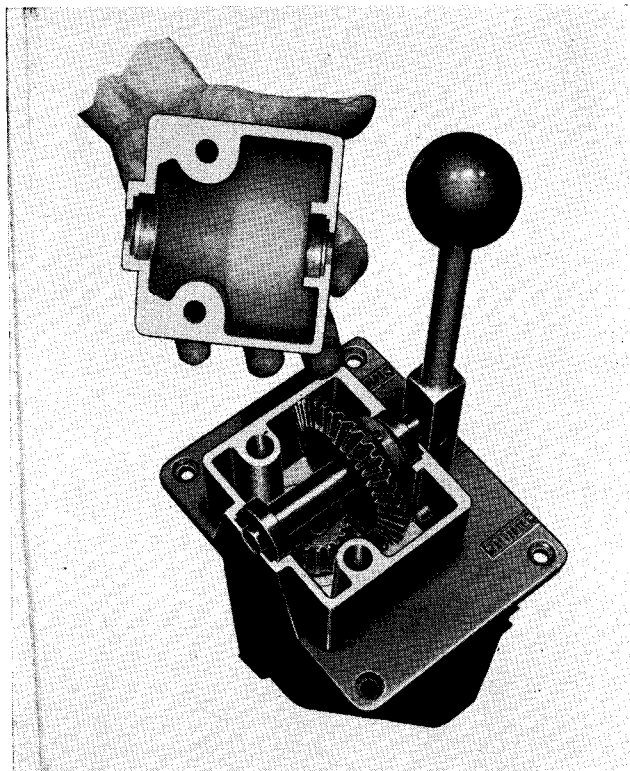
Type DM Master Switch, Top Housing Removed to Show Gearing
